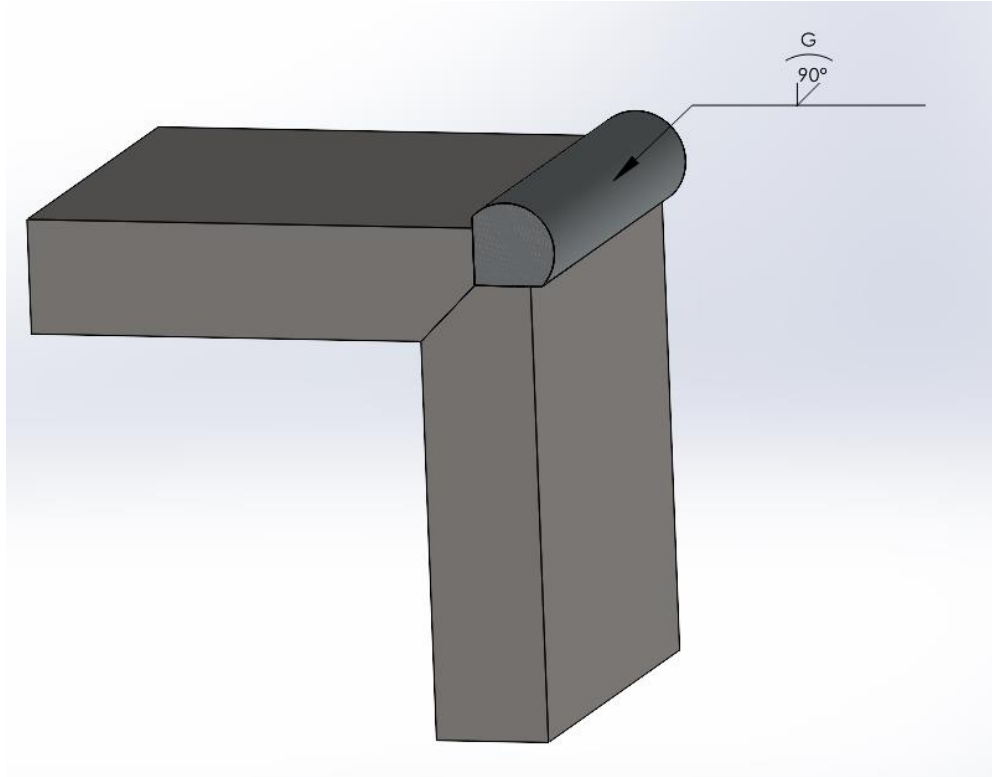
3-D Model (SolidWorks 2022) of the half-open corner groove joint design depicting a 90-degree groove weld with convex profile grinding.
